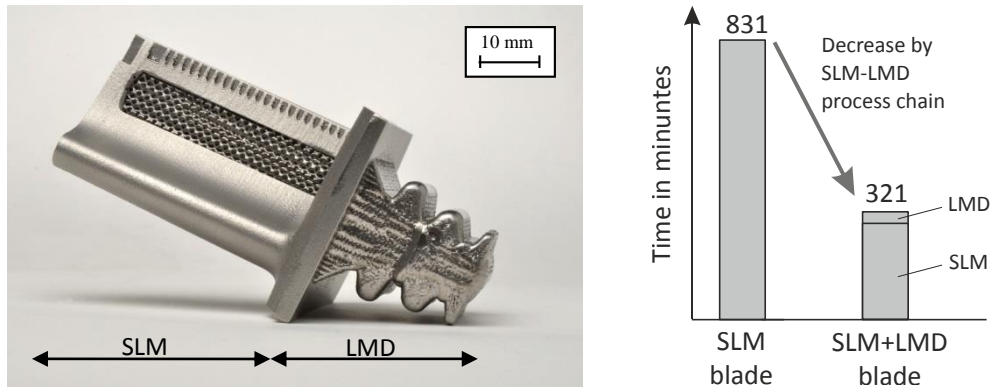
(a) Turbine blade manufactured with combined SLM-LMD process chain, Inconel 718; (b) Manufacturing time for different parts
